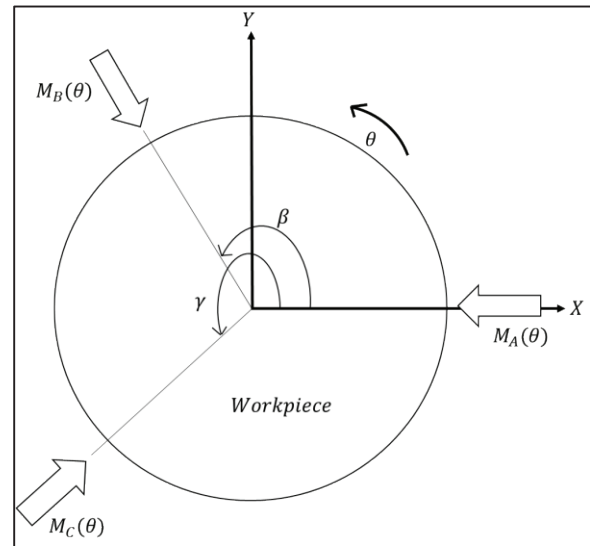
Multi-probe error separation, with three probes, for workpiece roundness and spindle error motion measurements.
